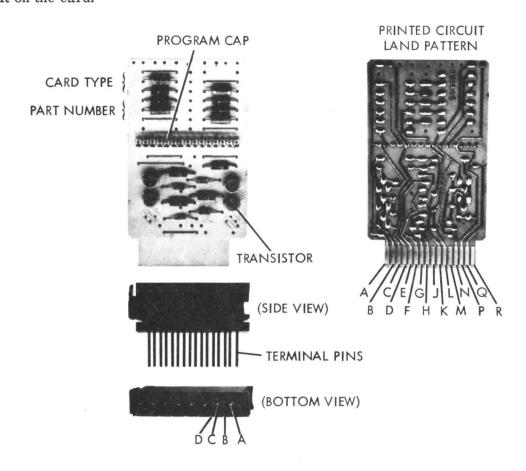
SMS Printed Circuit Card and Single-Position Receptacle
